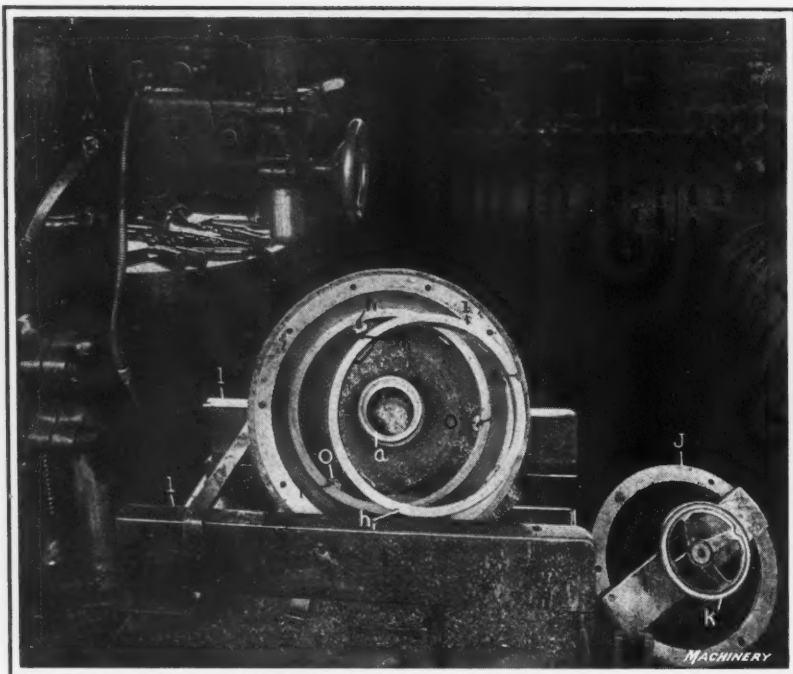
Vertical Drilling Machine with Jig for Use in drilling Half Holes in Gear-ring Fit
